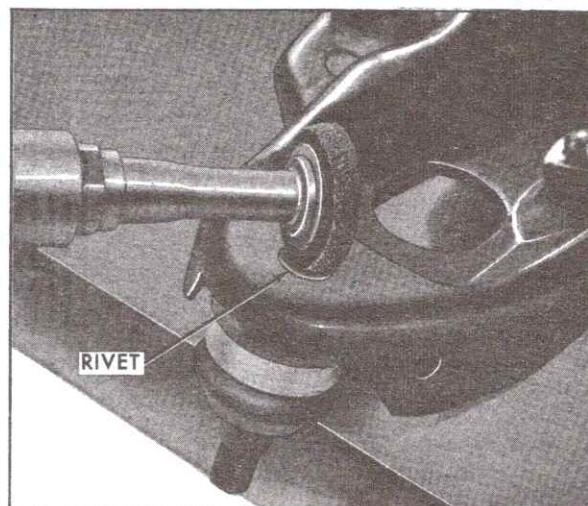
Removing Lower Ball Joint Center Rivet
